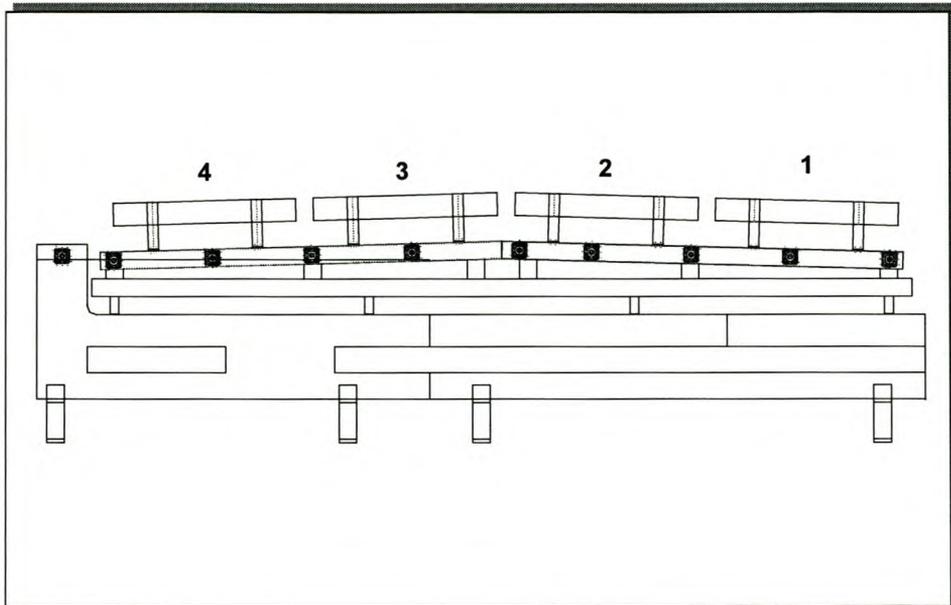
Side-view drawing depicting the assembly of the long wave infrared curing tunnel consisting of units 1 to 4 mounted on a steel frame (drawing courtesy of C. Butcher, B+ Projects).
